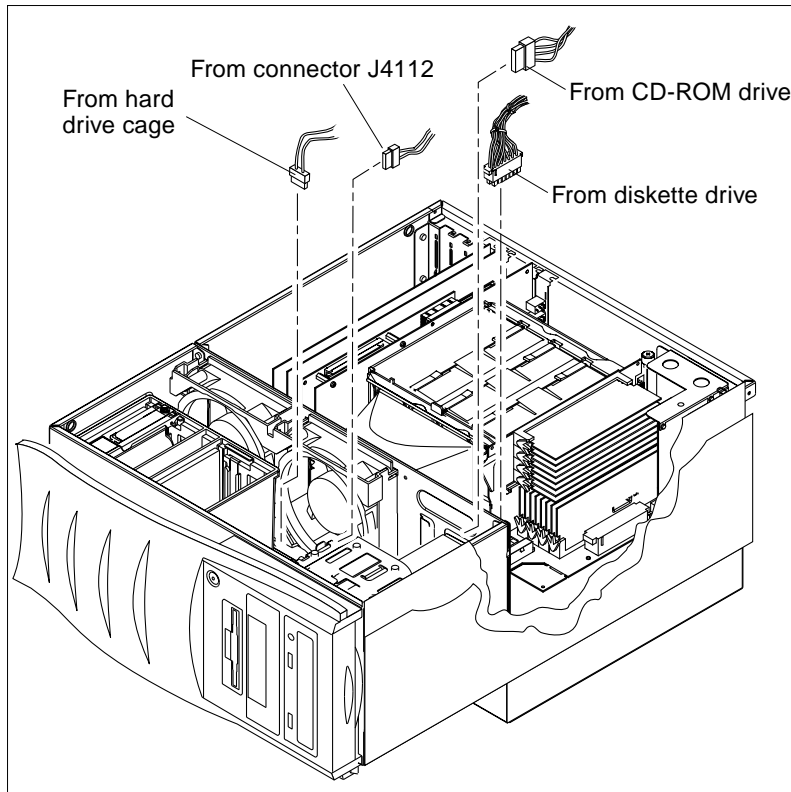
Removing and Replacing the Peripheral Power Cable Assembly
